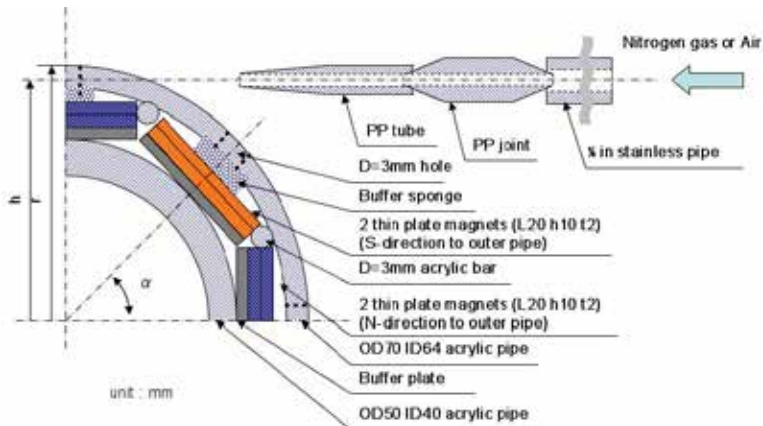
Schematic drawing of the nozzle and the rotary mechanism part
